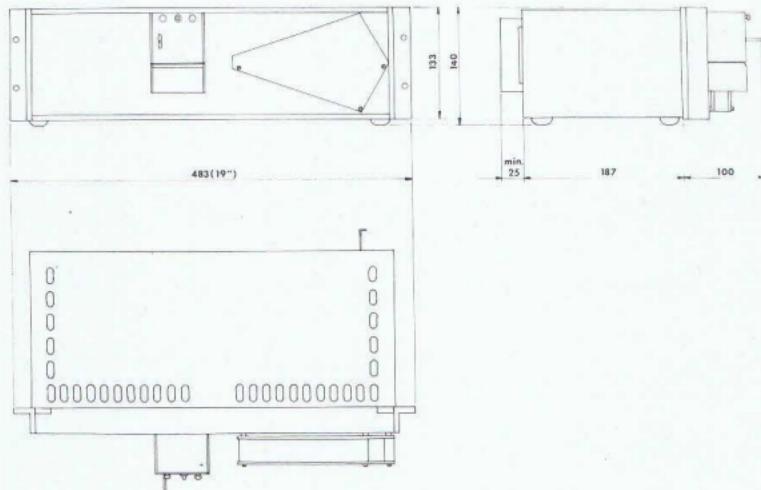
Outline drawings for rack version. All measures are in mm.
